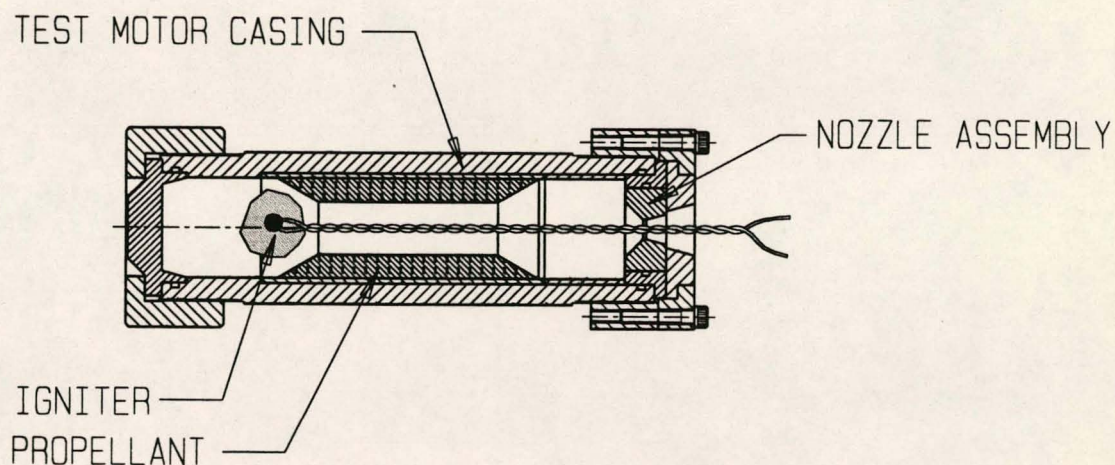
B61 TEST MOTOR ASSEMBLY
